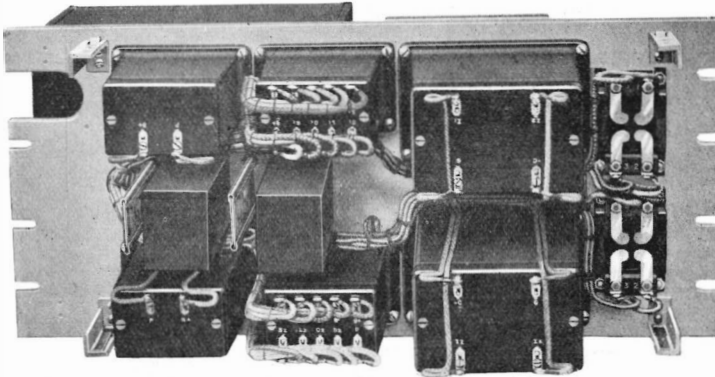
REAR VIEW WITH DUST COVER REMOVED.
